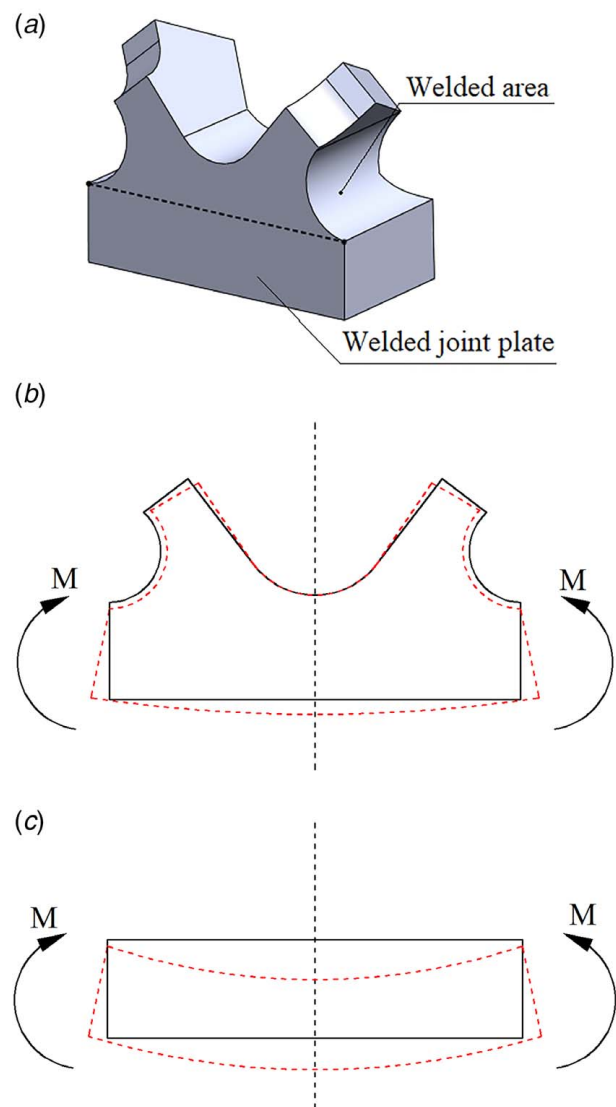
Comparison of plates with and without the fillet: (a) 3D view of a half welded joint cut from a symmetrical plane of the joint, (b) the welded joint plate with the fillet, and (c) the plate without the fillet; the thickness of the welded joint plate becomes larger due to the existence of the fillet
